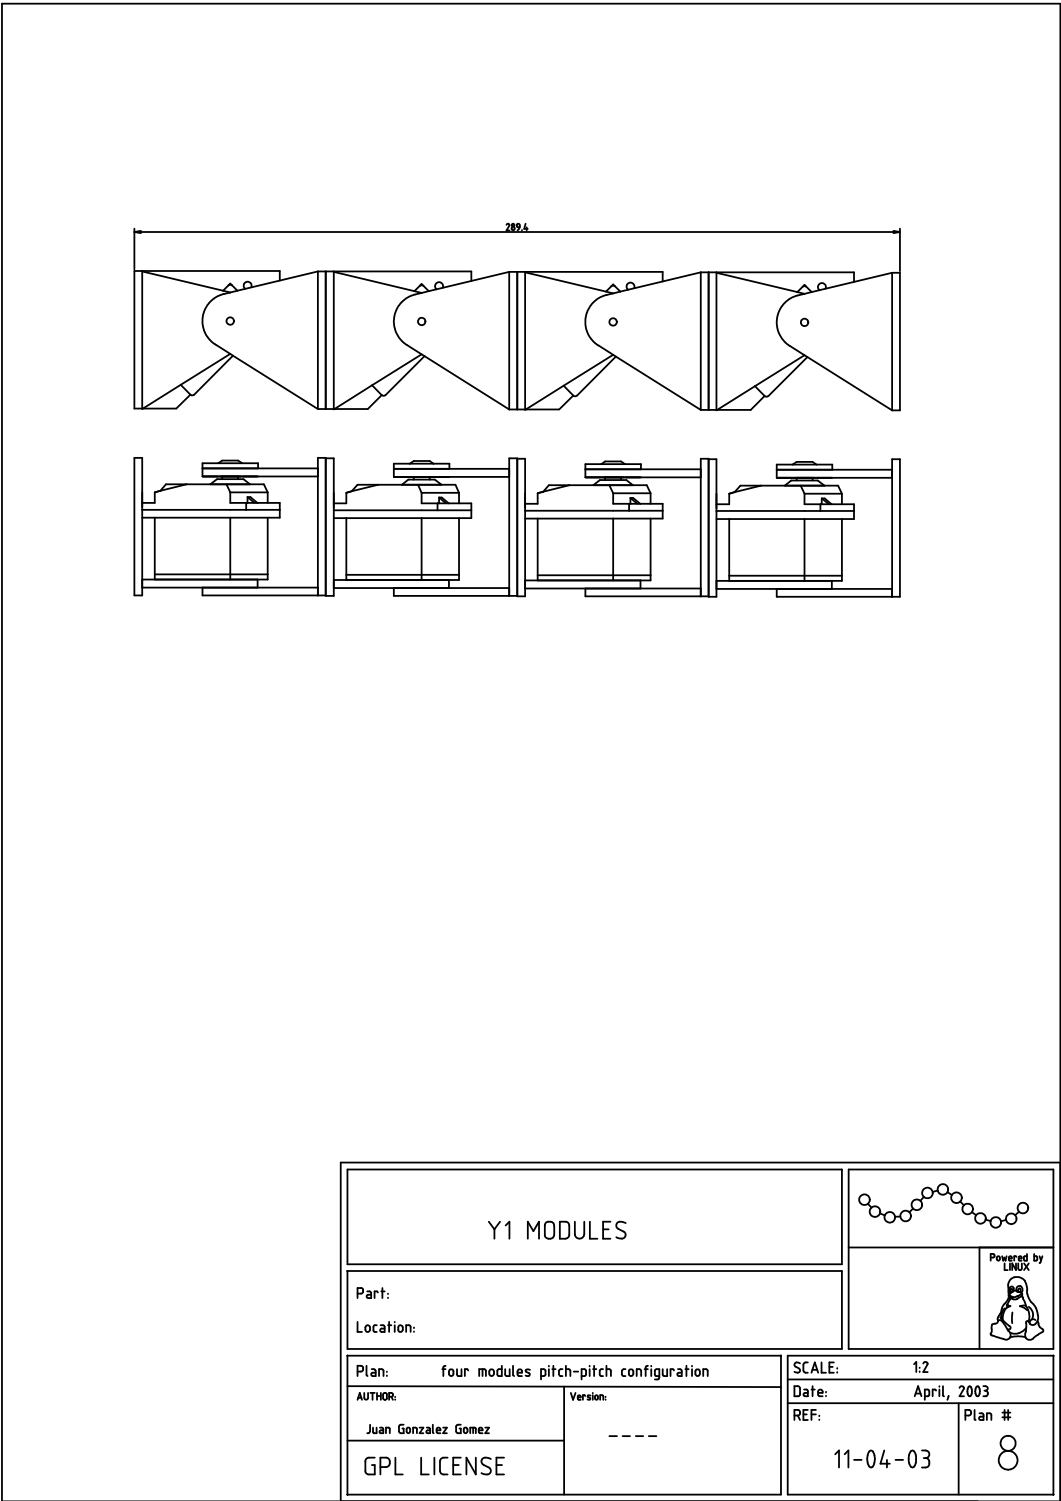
Plan 8: 4 Y1 modules with pitch-pitch connection.
